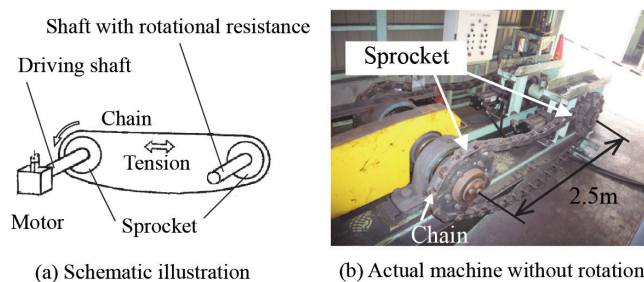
Conventional wear testing machine for the roller chain. (Online version in color.)
